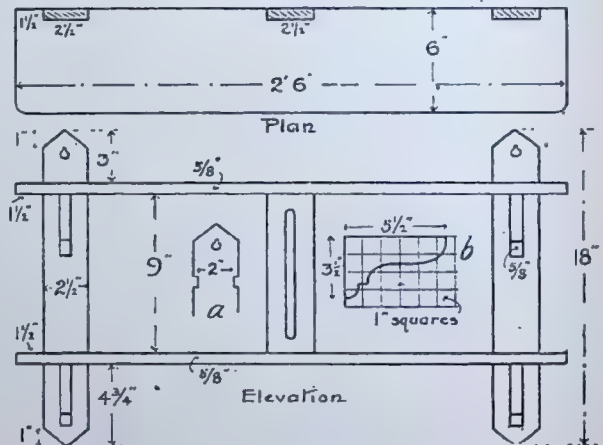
DIMENSIONED PLAN AND ELEVATION.
